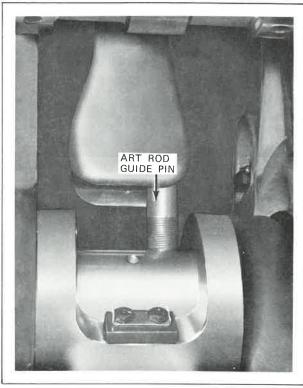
INSTALLING ART ROD USING GUIDE PIN, PART 147X1122.
